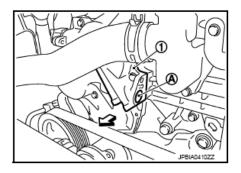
Identifying Valve Timing Control Cover And Solenoid Valve Hole Courtesy of NISSAN NORTH AMERICA, INC.
